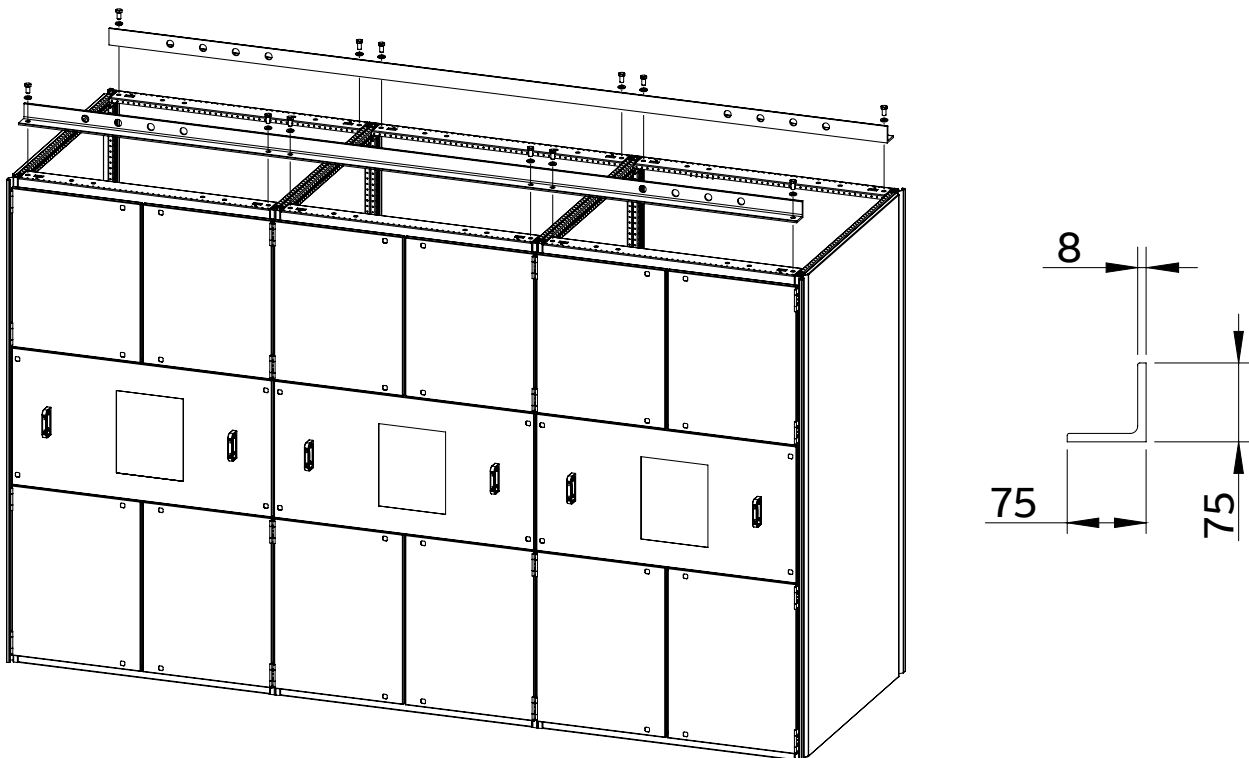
Arrangement of lifting by L – profile and L-profile details (dimensions in mm)
